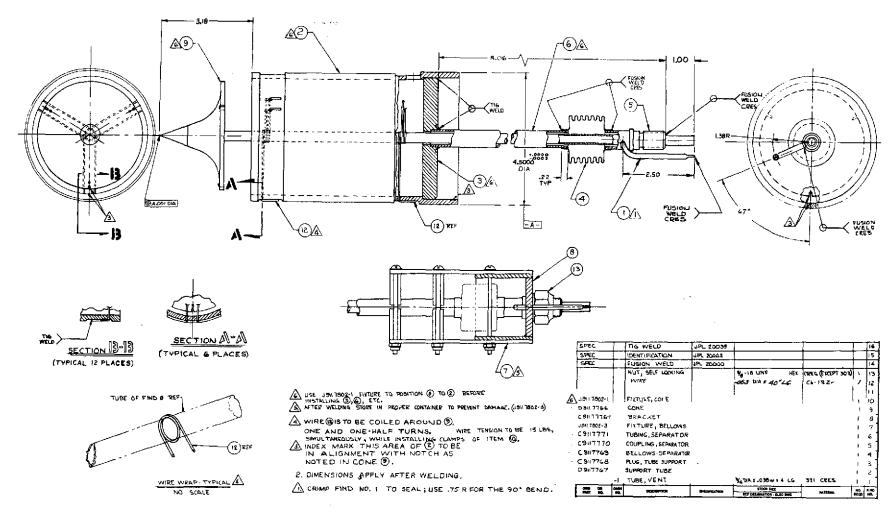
Assembly, cone and support, separator - 100-kW erosion loop
